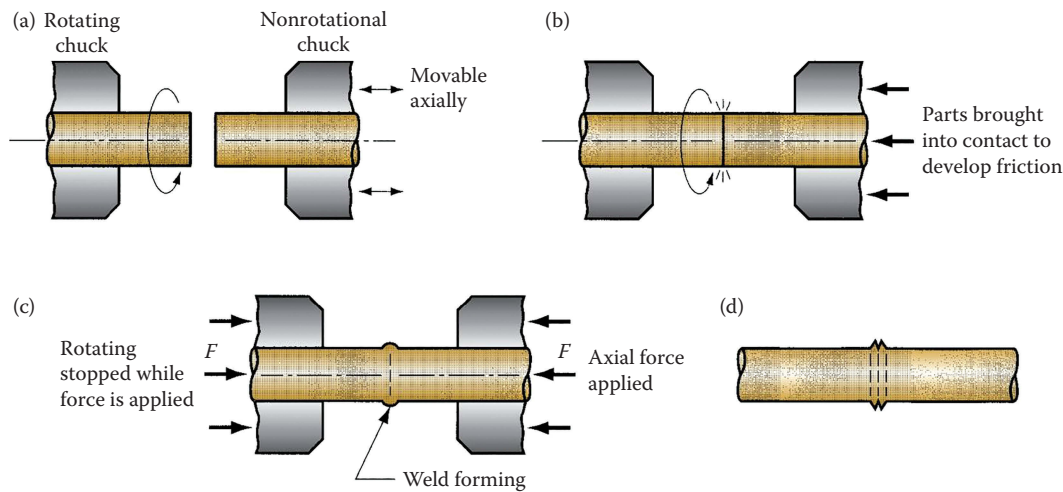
(1) Rotating part, no contact; (2) parts brought into contact to generate friction heat; (3) rotation stopped and axial pressure applied; (4) weld created^[12]
